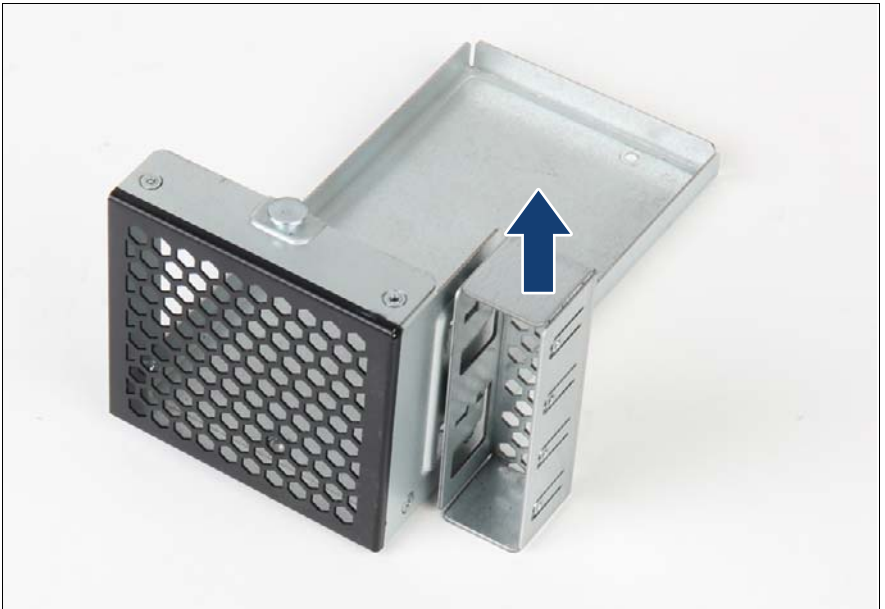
Removing the cover plate from the 2.5-inch dummy cage
